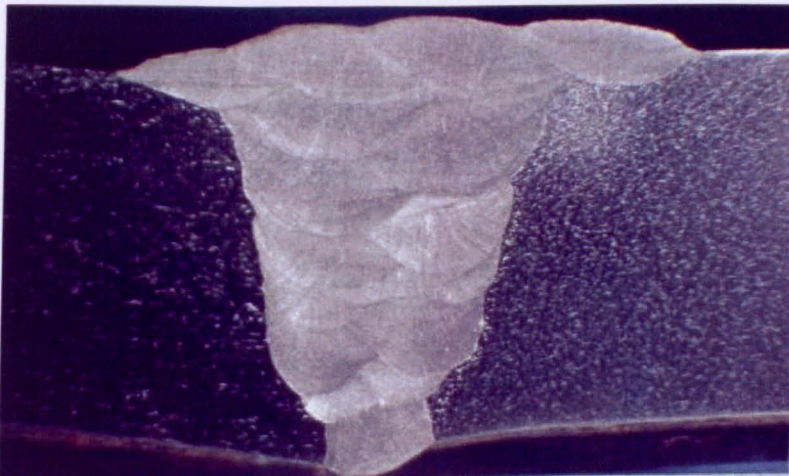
macrograph of the TRAINSS pipe butt weld [85]
